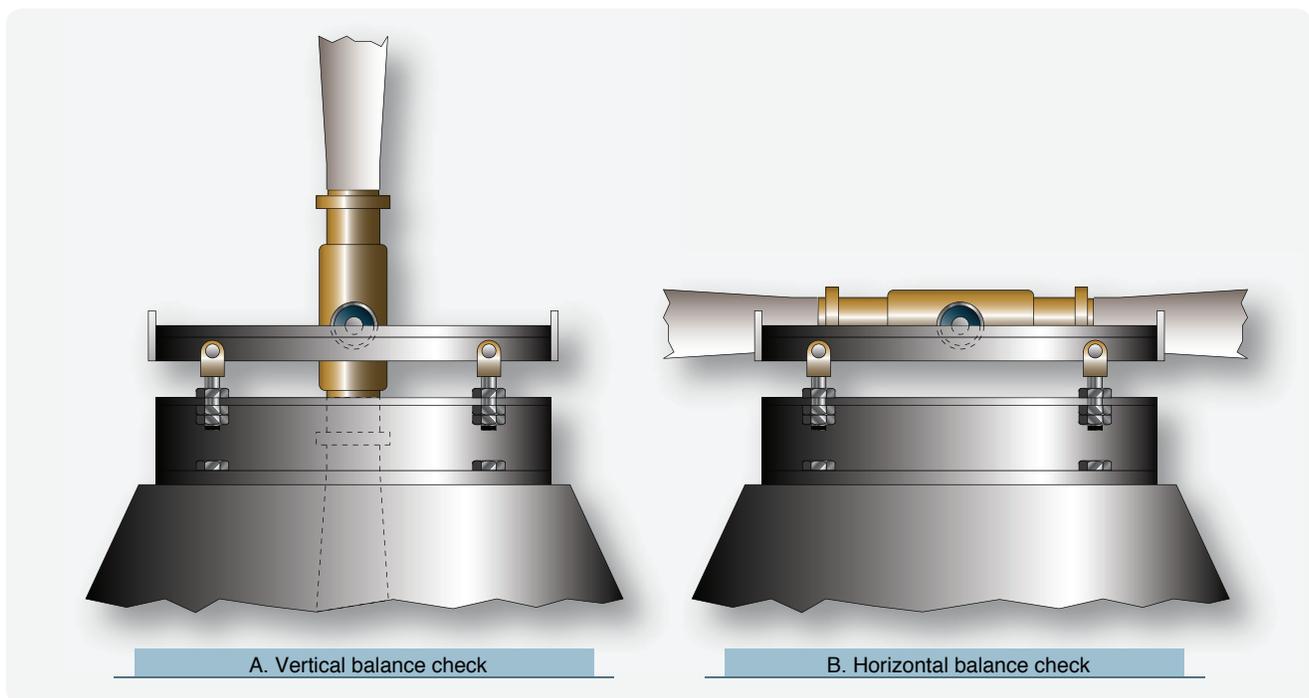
Checking two bladed propeller for static balance using knife-edge stand.
